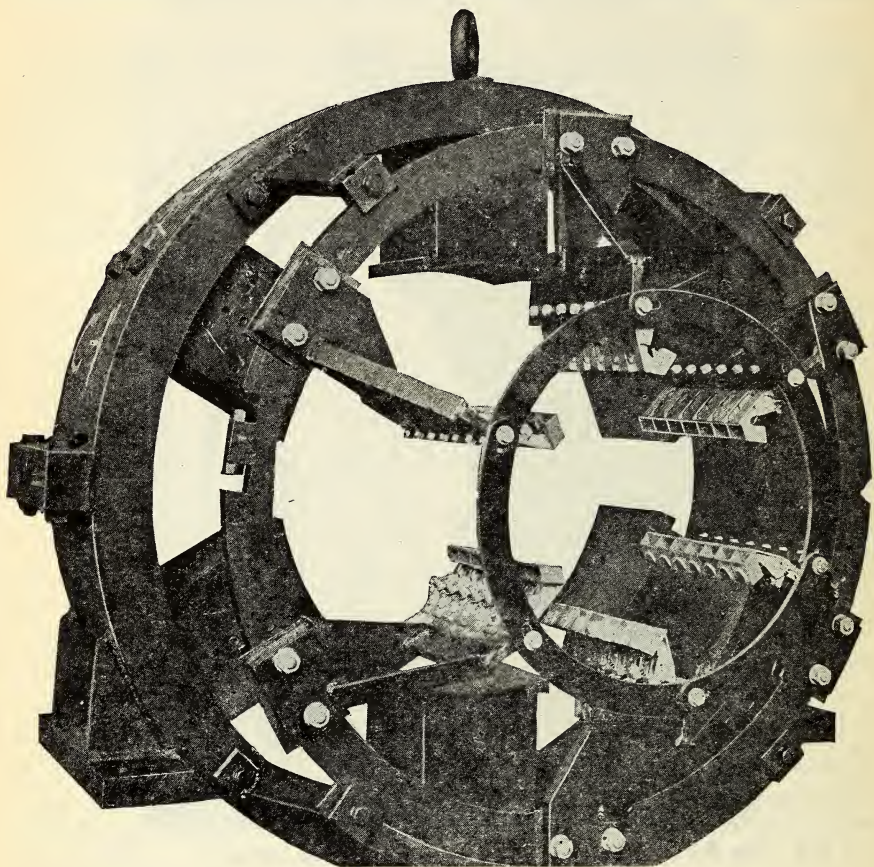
A typical casting-less d-c stator. The entire frame and brush rigging are made from rolled steel shapes, cut by gas flame and assembled by arc welding.
